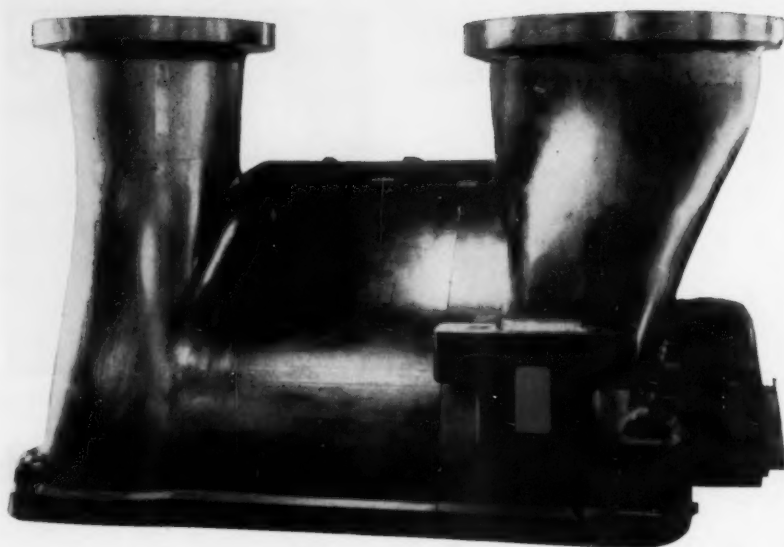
Pattern for centrifugal compressor casting designed for molding with drawbacks and cement-bond sand.
